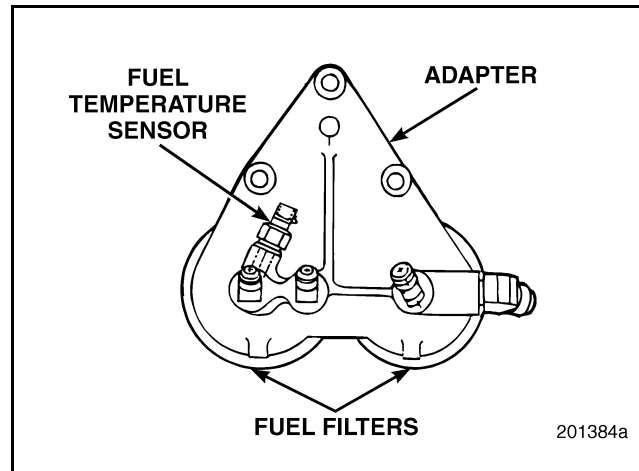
Fuel Filter Mounting Adapter (with Right-Side Mounted EECU)
